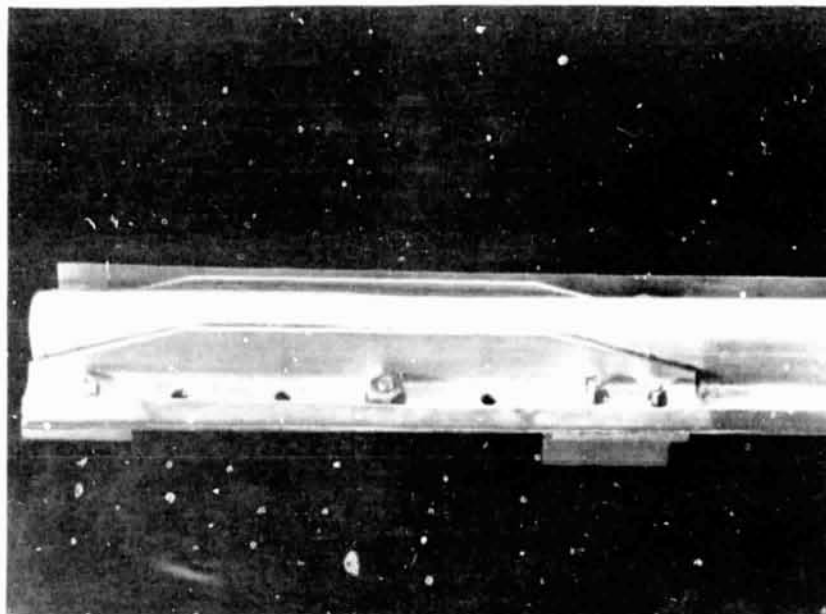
Repaired Sheet Stringer Specimen Prior to Riveting (139287)
